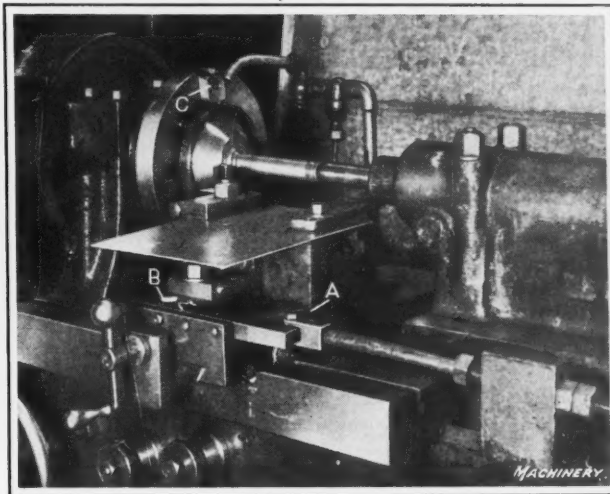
Geared-head Lathe equipped for rough-turning Angular Surface of Forging. In this Operation a Special Taper-turning Attachment is employed
